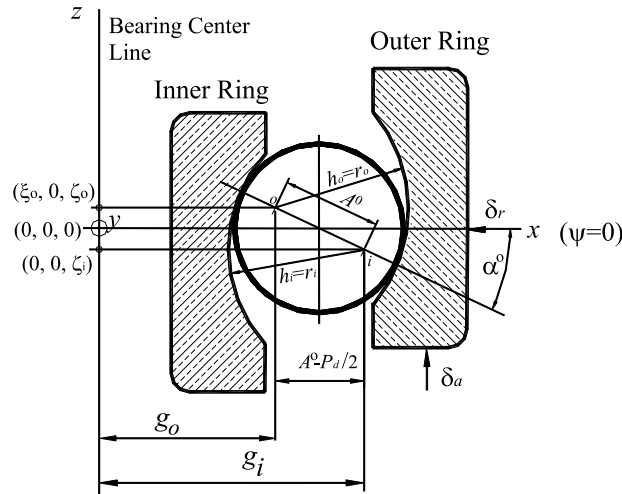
Cross-section of an unloaded ball bearing that shows the ball-race contacts.
